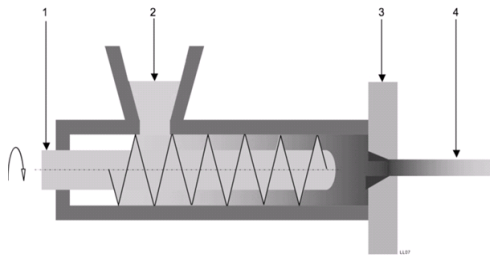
Section view for the wet charcoal extruder (1) the compression screw; (2) feed hopper; (3) mould and (4) formed charcoal
